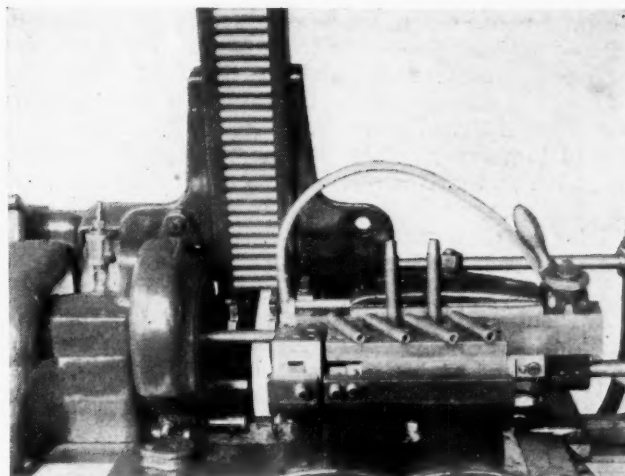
Pratt & Whitney automatic lathe equipped with fountain feed for turning the outside of valve stem guides at the rate of about 270 pieces per hour.
